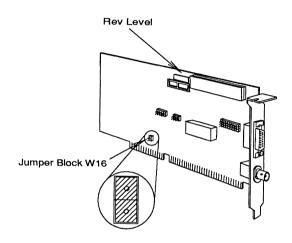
Location of Rev Level and Jumper Block W16 on an NE2000 Board
